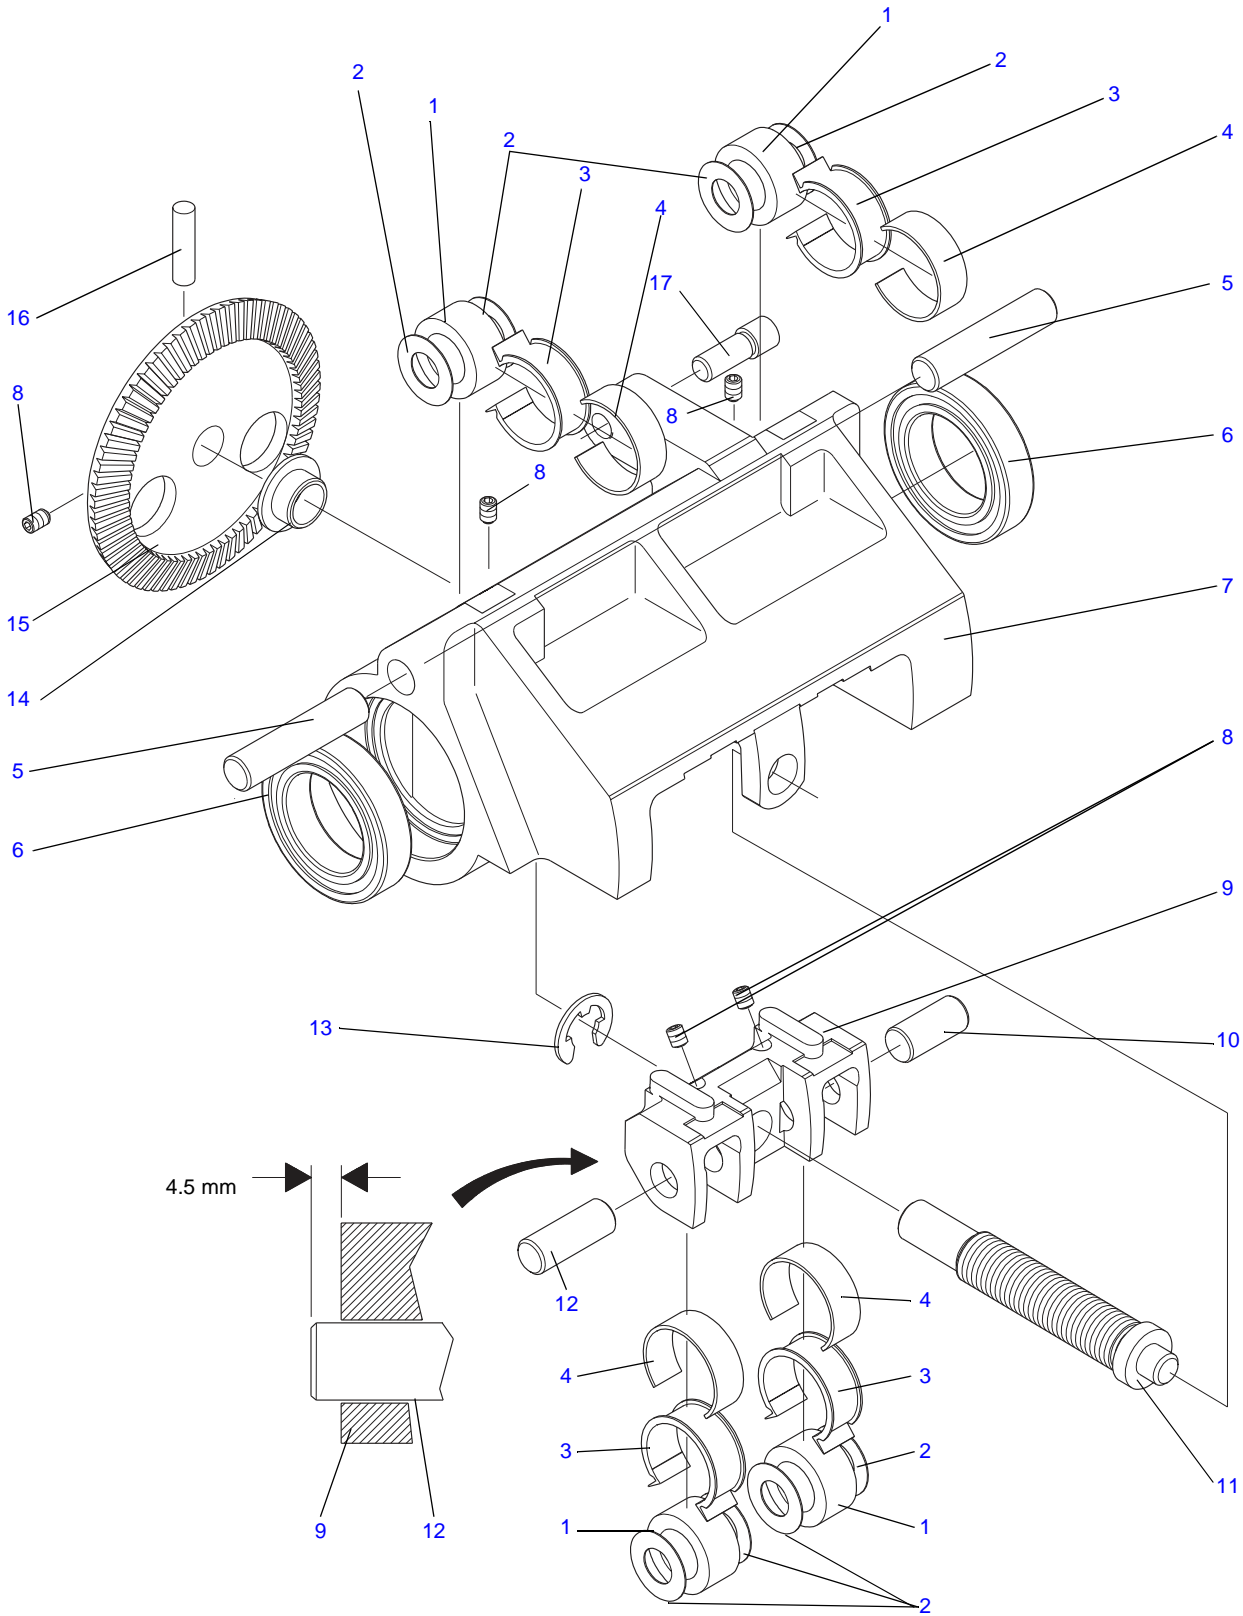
Vector 700 Pan and Tilt Head - Balance Adjuster Assembly
